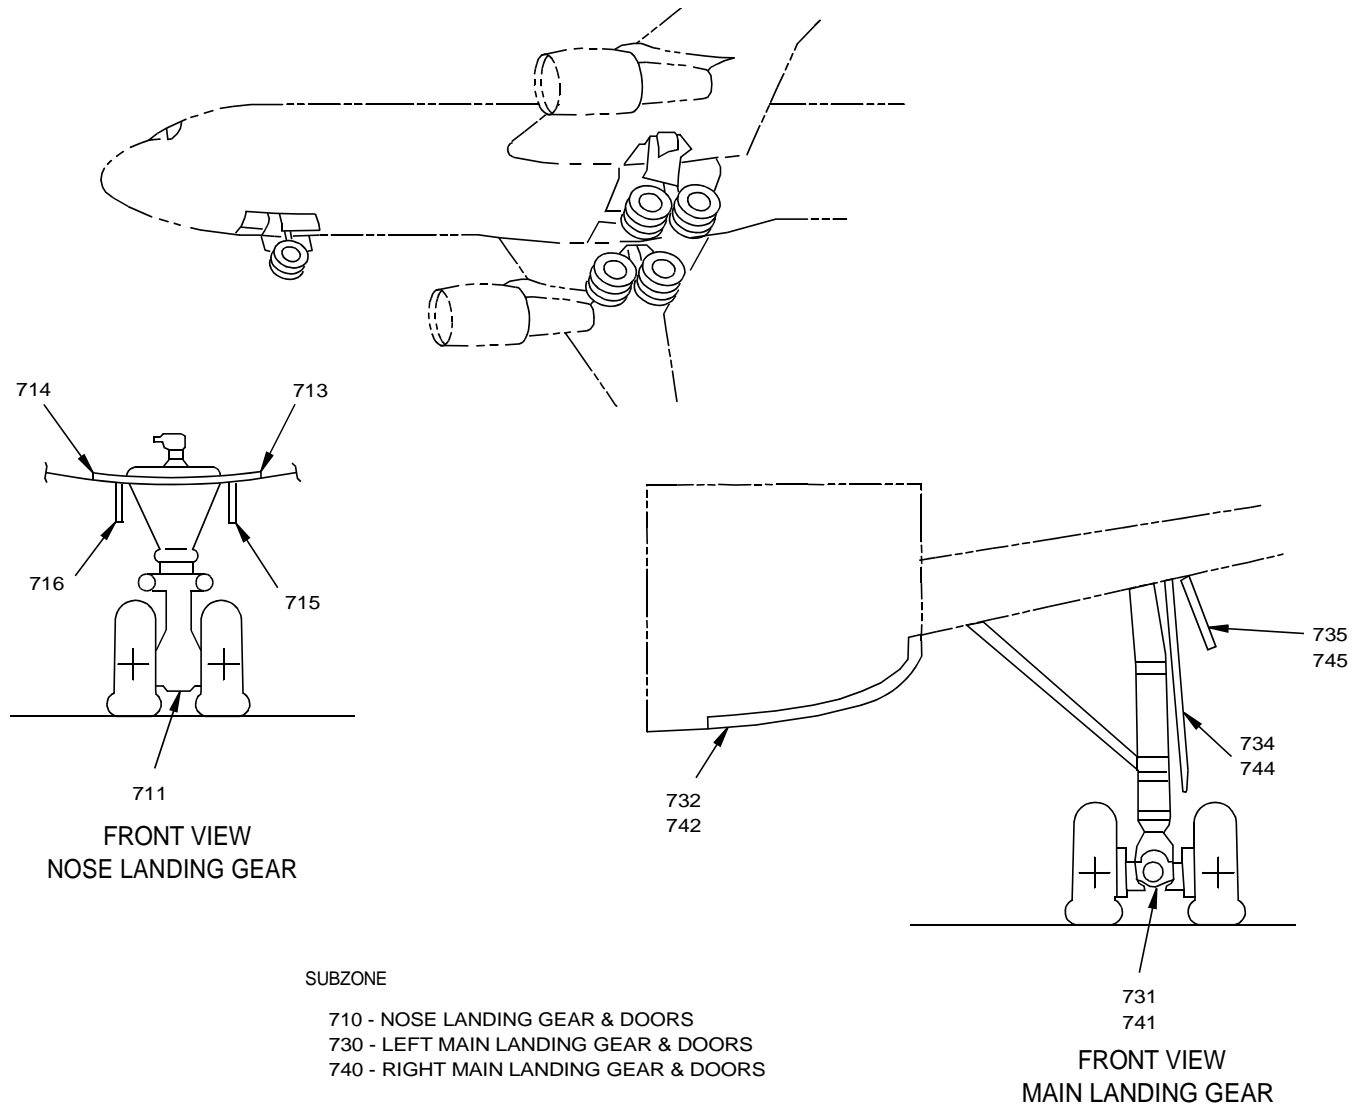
MAJOR ZONE 700 - LANDING GEAR & LANDING GEAR DOORS, 767-400ER
